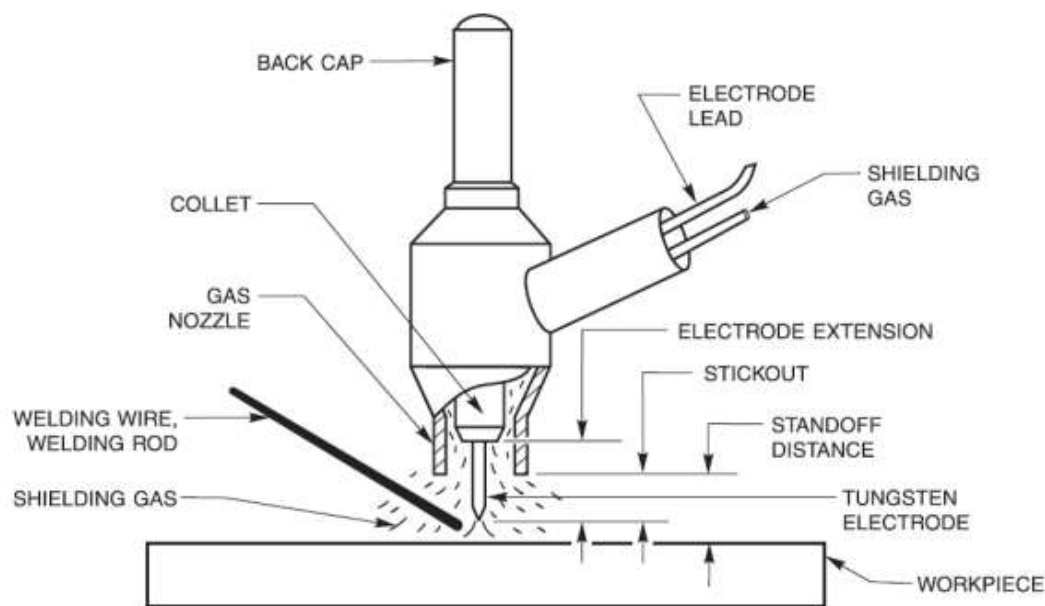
Gas Tungsten Arc Welding Torch Nomenclature
